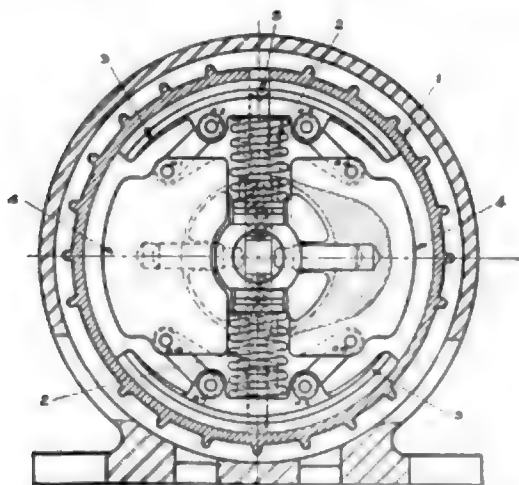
Sectional view of one form of Gray & Davis friction drive, perpendicular to armature shaft
